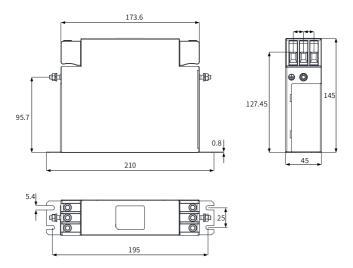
Filter dimensions (FN3288-20-25-33) (unit: mm)
